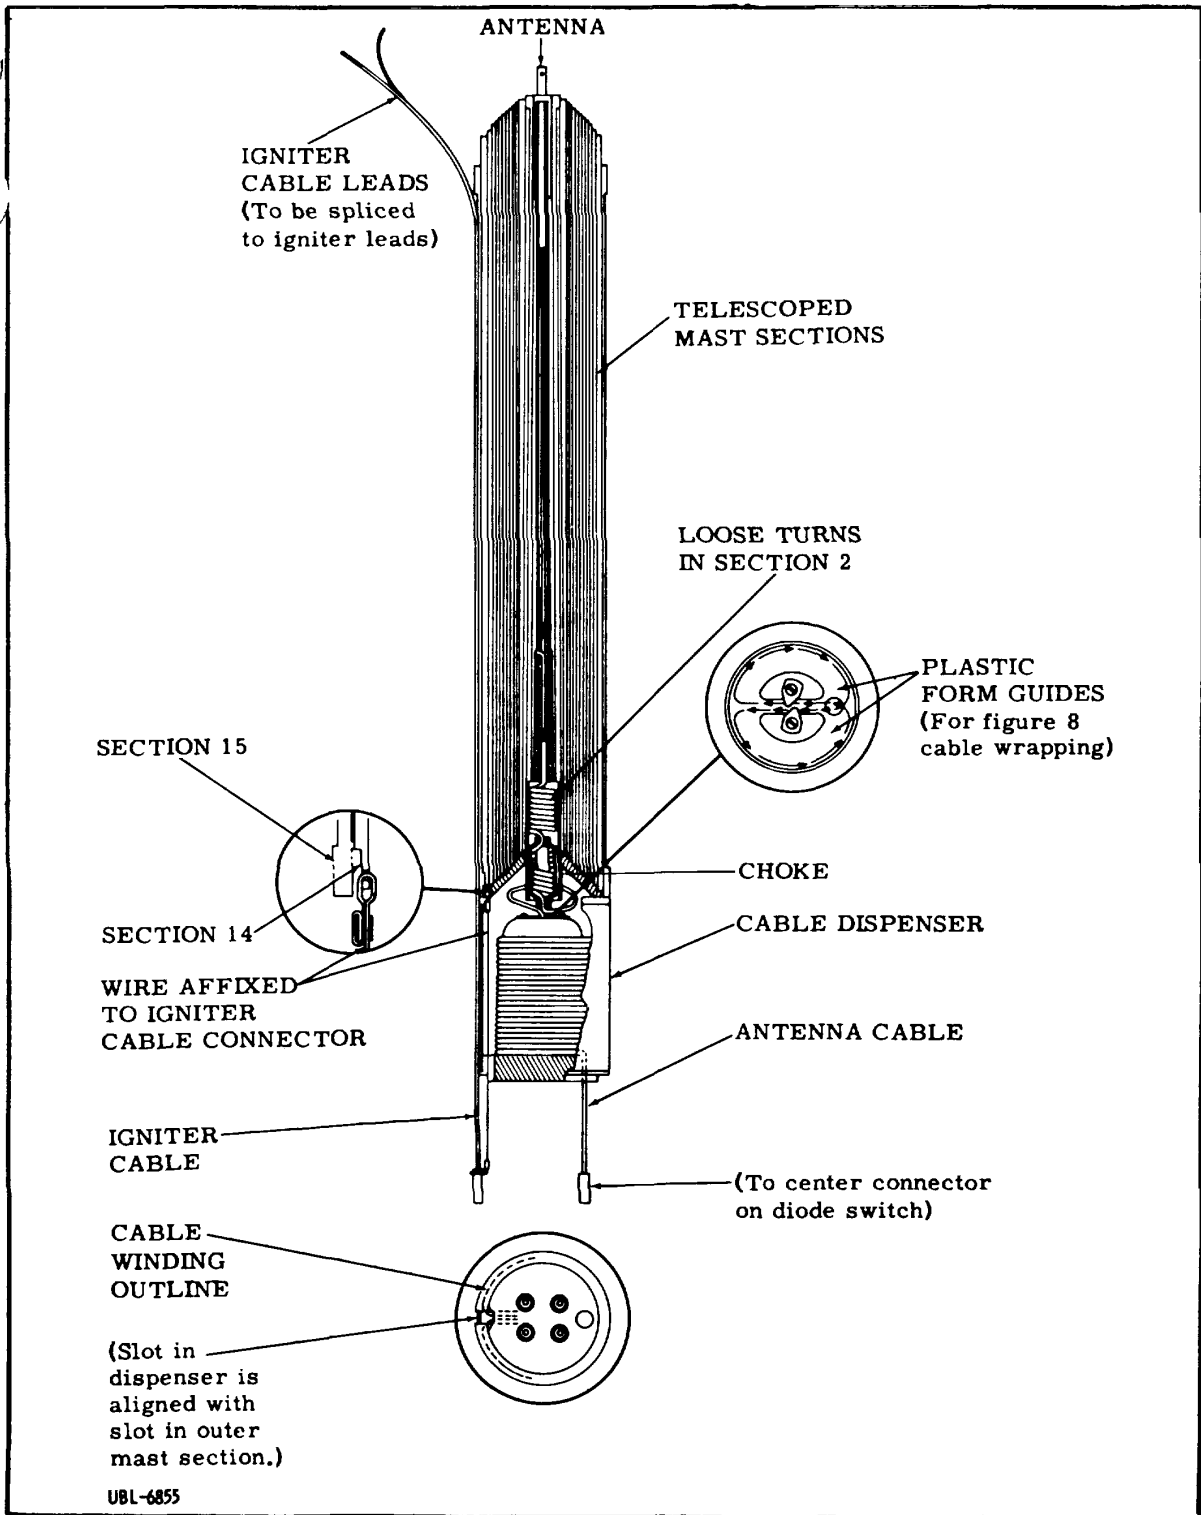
L. Details of Antenna Cable Dispenser and Mast Assembly
